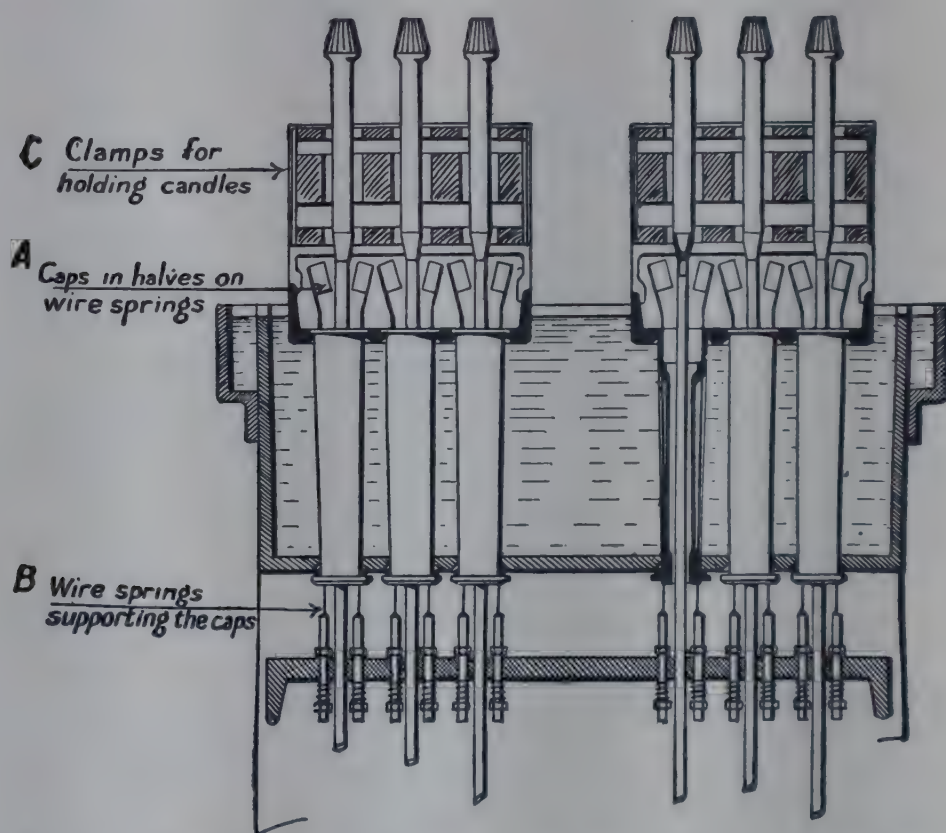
Durpitt's Machine for Moulding Candles with Self-fitting Ends.
